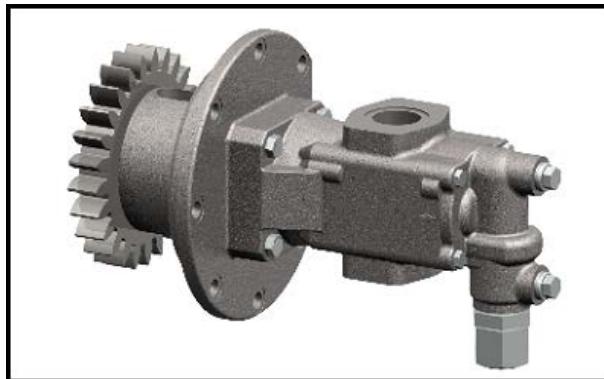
Gear pump with attachment bearing unit (example: R25)
